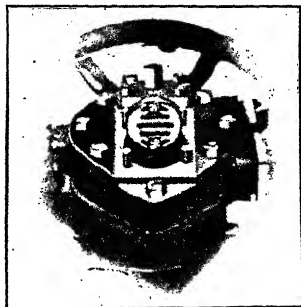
Portion of engine cylinder showing location of feather valves.
